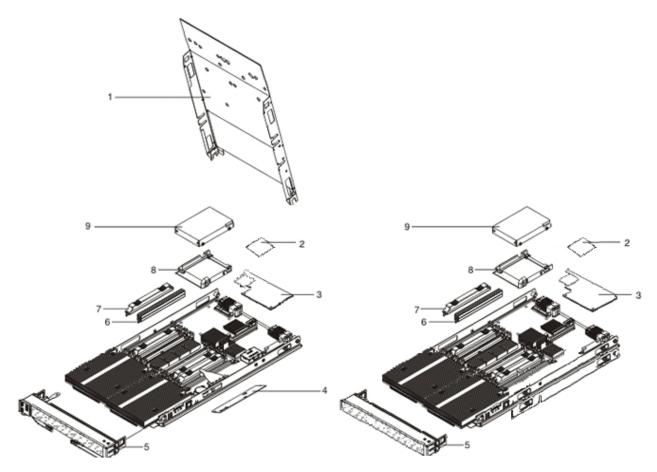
Parts illustration, Type 7778. JS23 base unit with cover, followed by JS43 expansion unit
